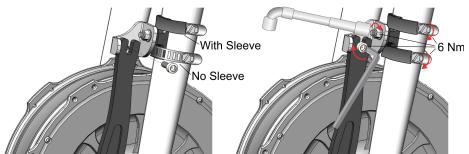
Frame Clamp installed to fork. Once aligned, all fasteners should be tightened to 6 Nm. Rubber sleeve can be cut to size and slipped over hose clamps.
